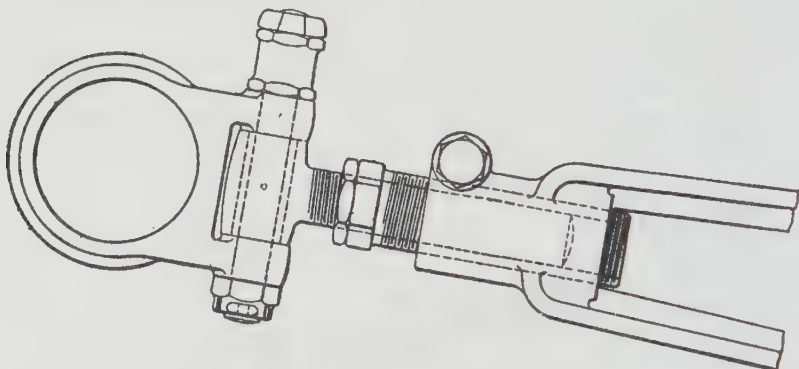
RADIUS ROD DOUBLE PIVOTAL FORWARD JOINT.
